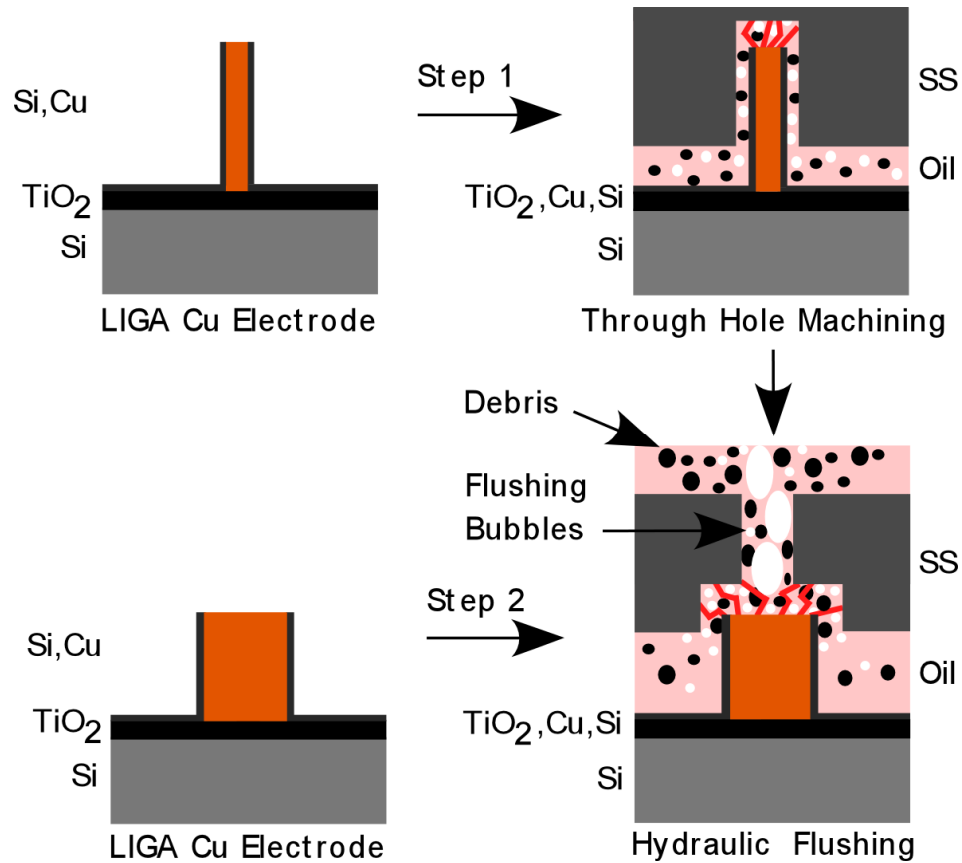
Machining process for 2-step hydraulic debris flushing. Step 1: machine narrow through-holes, Step 2: Overlay workpiece on new tool area and machine finished pattern. Flushing bubbles and tool dither force debris out the through-hole.
